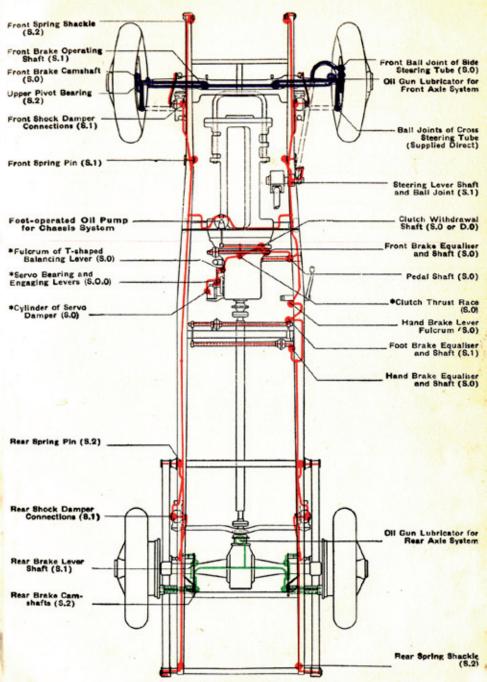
DIAGRAM OF CHASSIS LUBRICATION SYSTEM.
